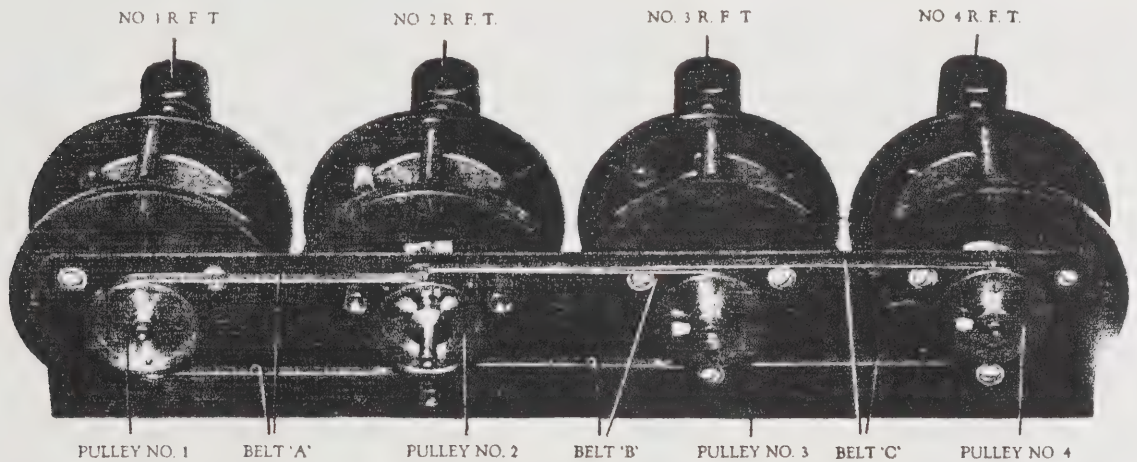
FRONT VIEW OF MODEL 32 SUB-PANEL ASSEMBLY. The same arrangement of pulleys and belts is used on Models 33, 36 and 49, except that the dial-condenser pulley is usually placed with the hollow side toward the condenser.
